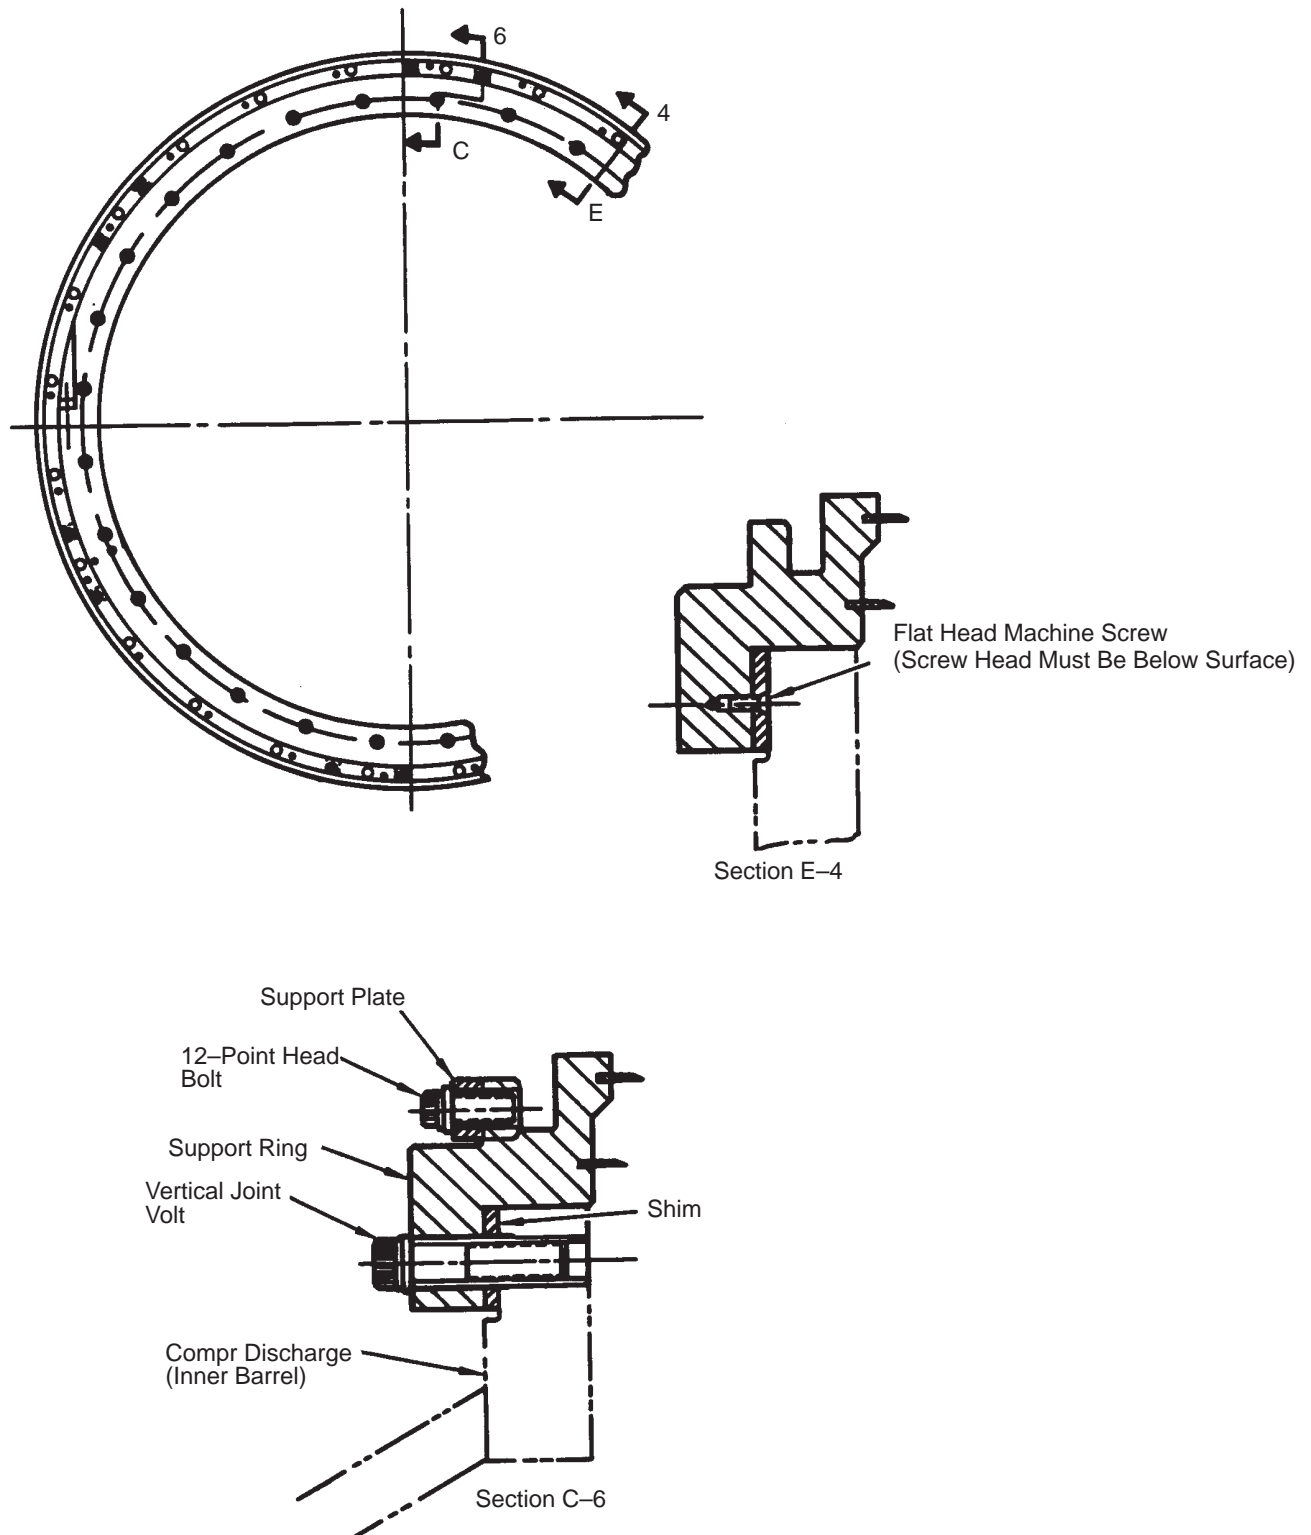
Removing First-Stage Nozzle Support Ring.
